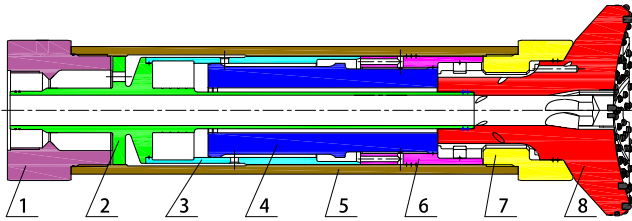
Main parts in RC-DTH air hammer. 1: upper connection; 2: centre tube; 3: inner casing; 4: piston; 5: outer tube; 6: spacer bush; 7: splined hub; and 8: drill bit.
